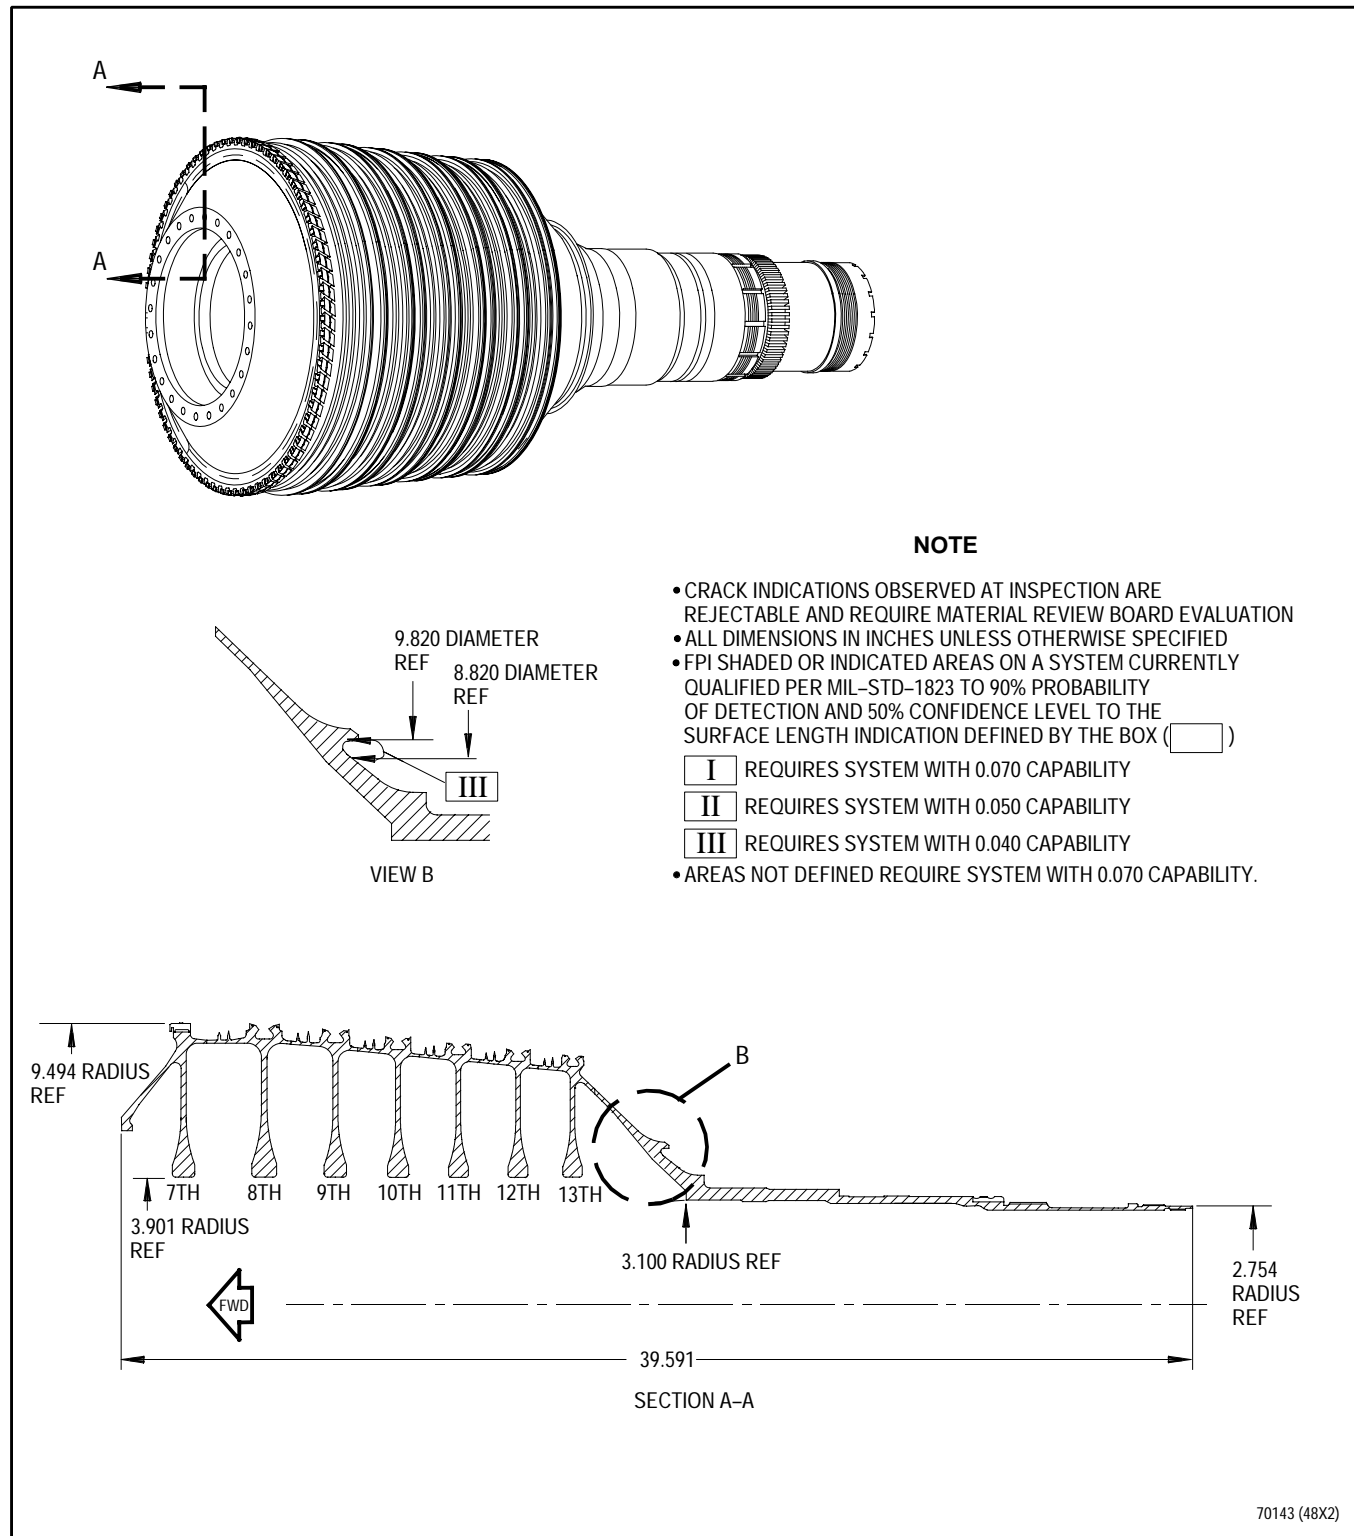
A. Seventh Through Thirteenth Stage Rear Compressor Disk-Drum Rotor Assembly - Required Fluorescent Penetrant System Capability
